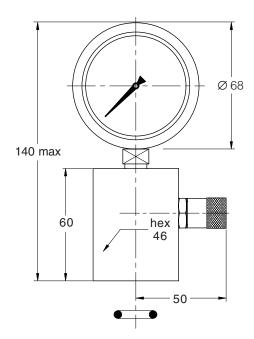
GAE Pressure Gauge Adapter - Dimensions
